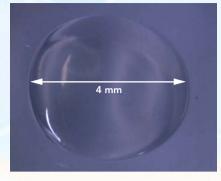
4 mm diameter optically clear spot weld through 2 mm thick unmodified polypropylene.
